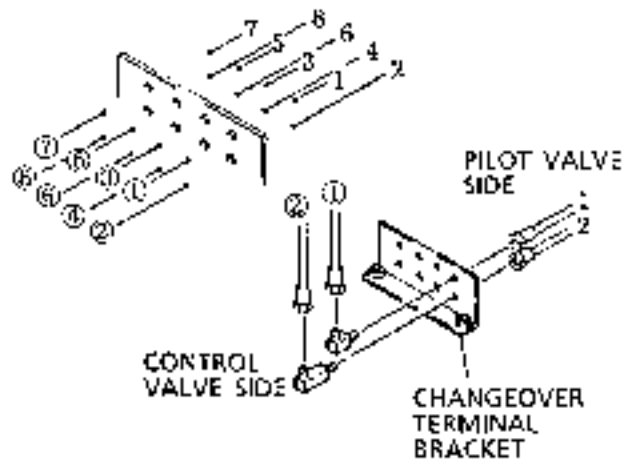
Disconnecting pilot piping for operating lever (at bracket)
